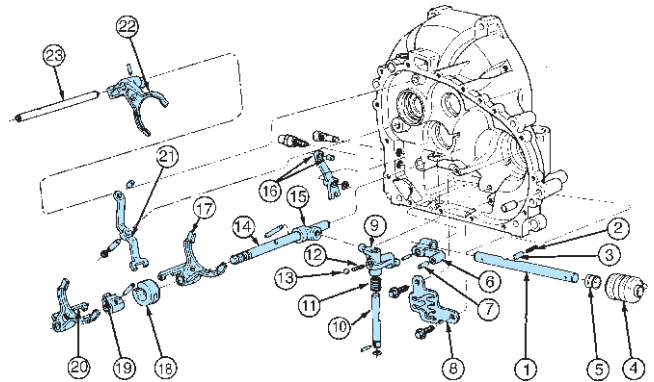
Exploded view of the internal shift linkage from a transaxle using a shift rod. (Courtesy of Ford Motor Company)
